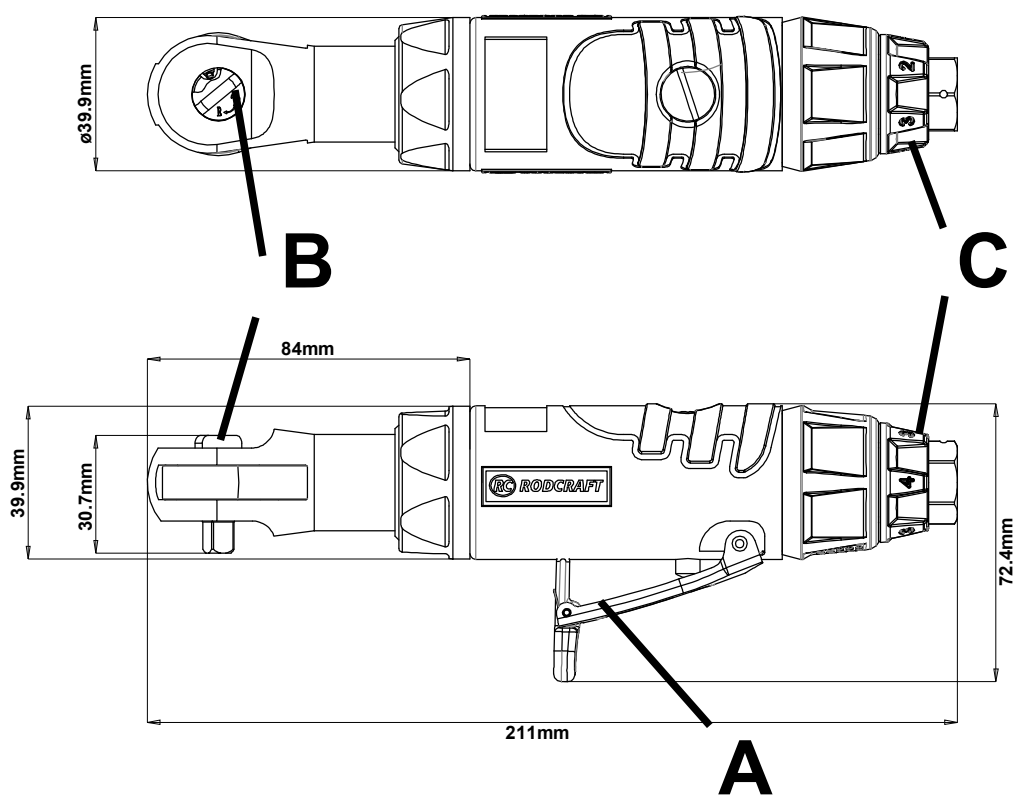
RC3068 & RC3268 DIMENSIONS
